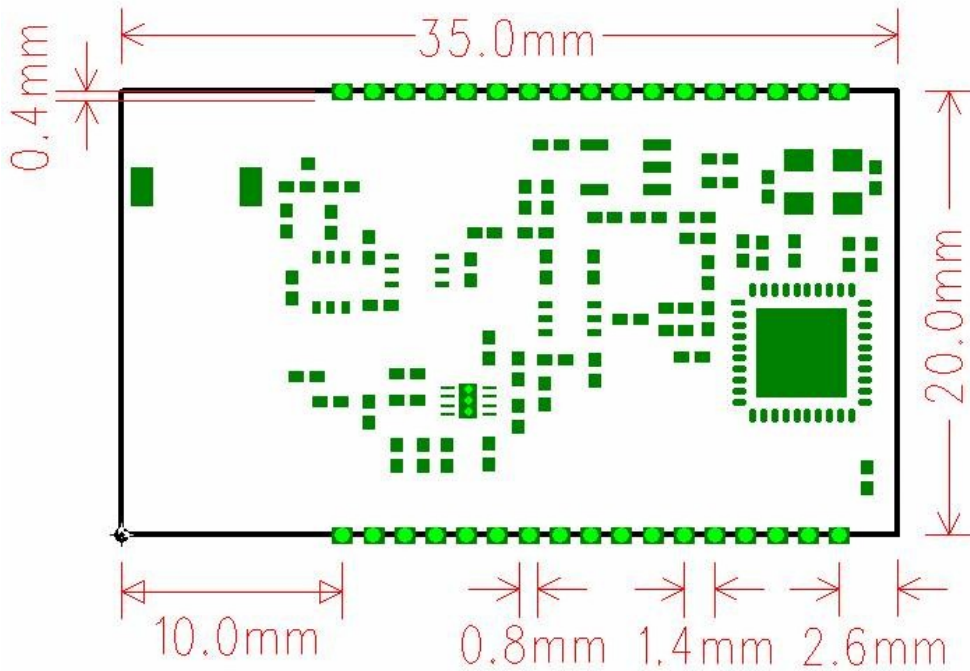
PCB mechanical drawing of QRF-0600 Module (front view)
